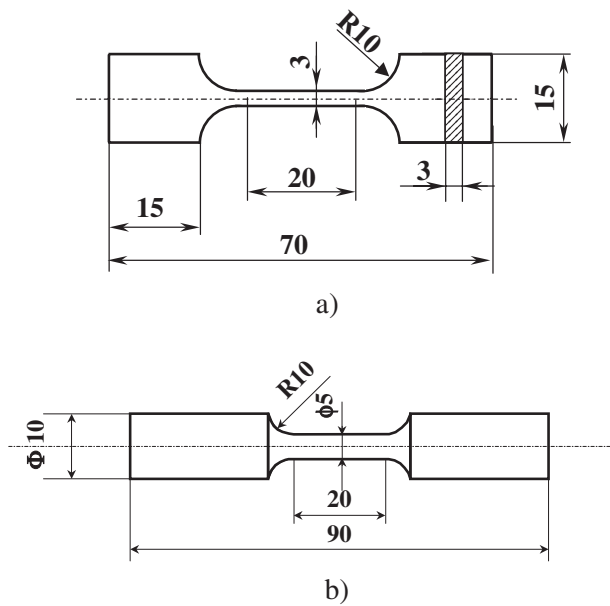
Geometry of a) tensile test specimen and b) fatigue test specimen in mm.
